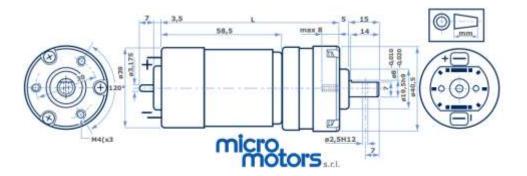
DC motor used, which has a gearbox to increase the torque of it (192-91-12V).
